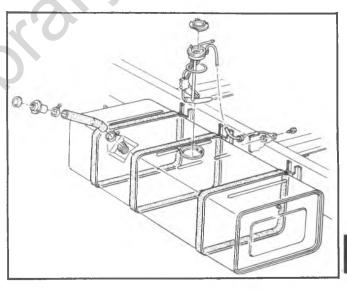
Fuel Tank (50 Gal.), Meter and Filler Neck-P30 Model
